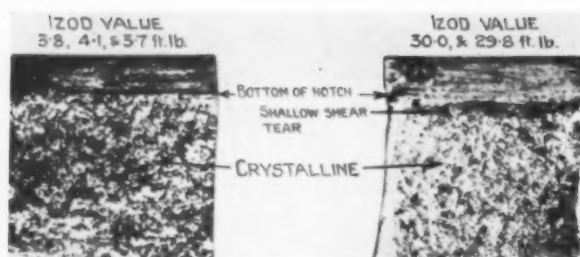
Fracture surfaces of two specimens following Izod tests.
